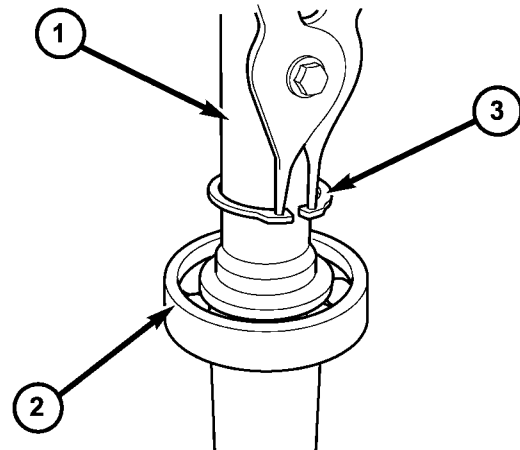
Remove Extension Shaft Bearing Retaining Ring
